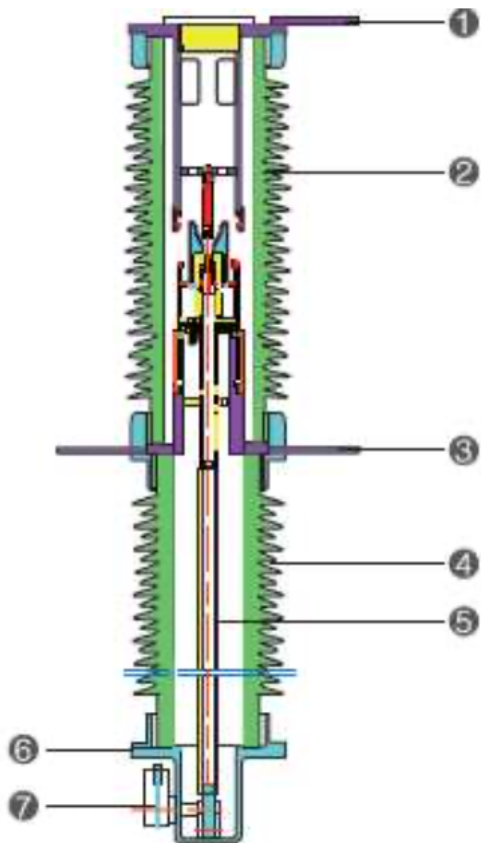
1 – upper terminal plate, 2 – interrupter unit, 3 – lower terminal plate, 4 – porcelain insulator, 5 - insulating push rod, 6 - crank case, 7 – operating shaft [23]
